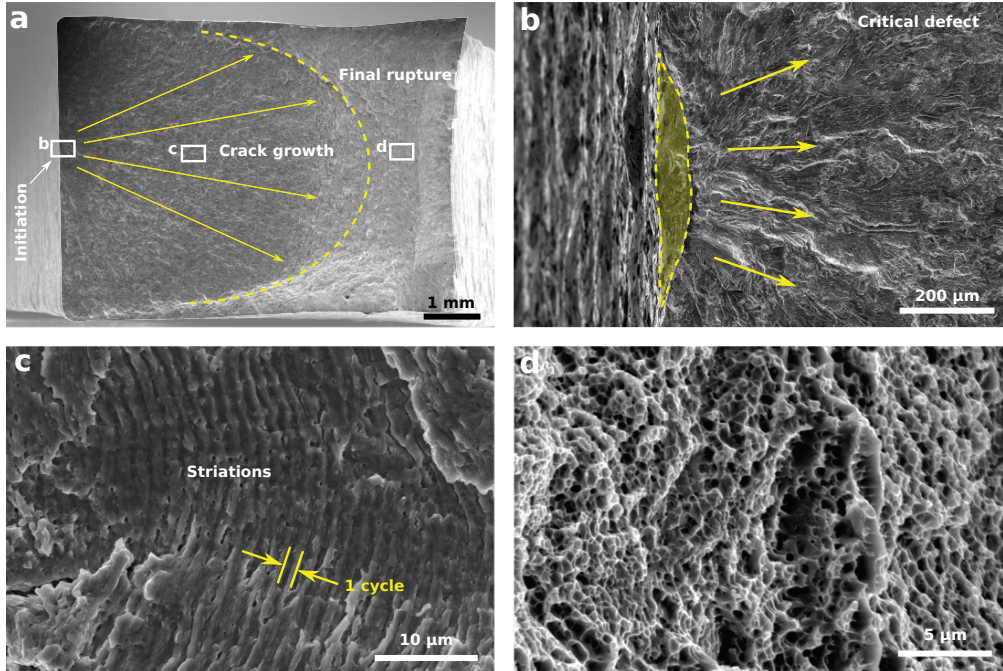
Fracture surface viewed in scanning electron microscope after failure due to fatigue loading. (a) Full fracture surface with initiation, crack growth and final rupture zone indicated, (b) Fatigue initiation site and the critical defect, (c) crack growth zone and striations for each loading cycle and (d) final rupture size with dimples indicating ductility.
